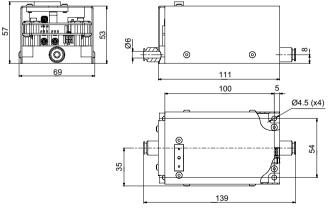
Outline drawing of DPS/DPD-FAM series drivers.
